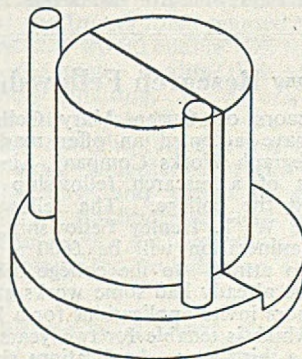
(b).—Shear-test Adaptor with Pasted Core in Position.
